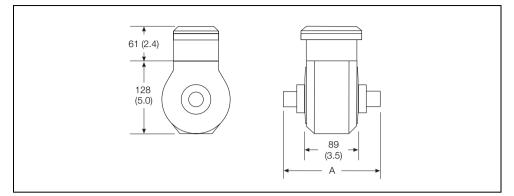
DN 15 to 25 Reduced Bore - Remote Transmitter Mounting Options
